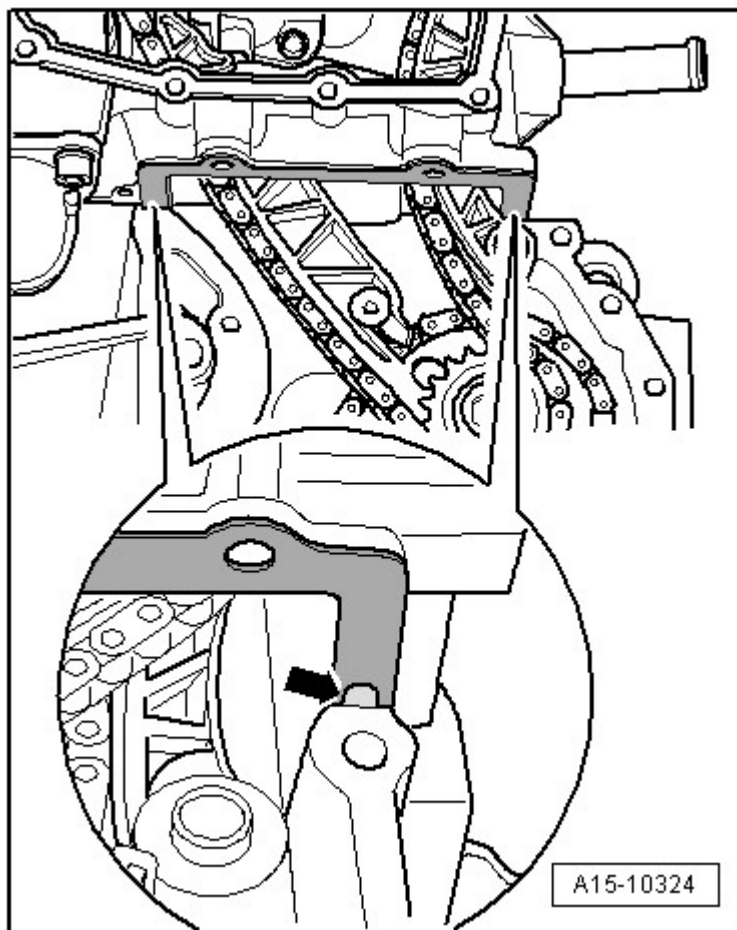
Cleaning Holes -Arrow- In Cylinder Head Gasket Of Old Sealant
